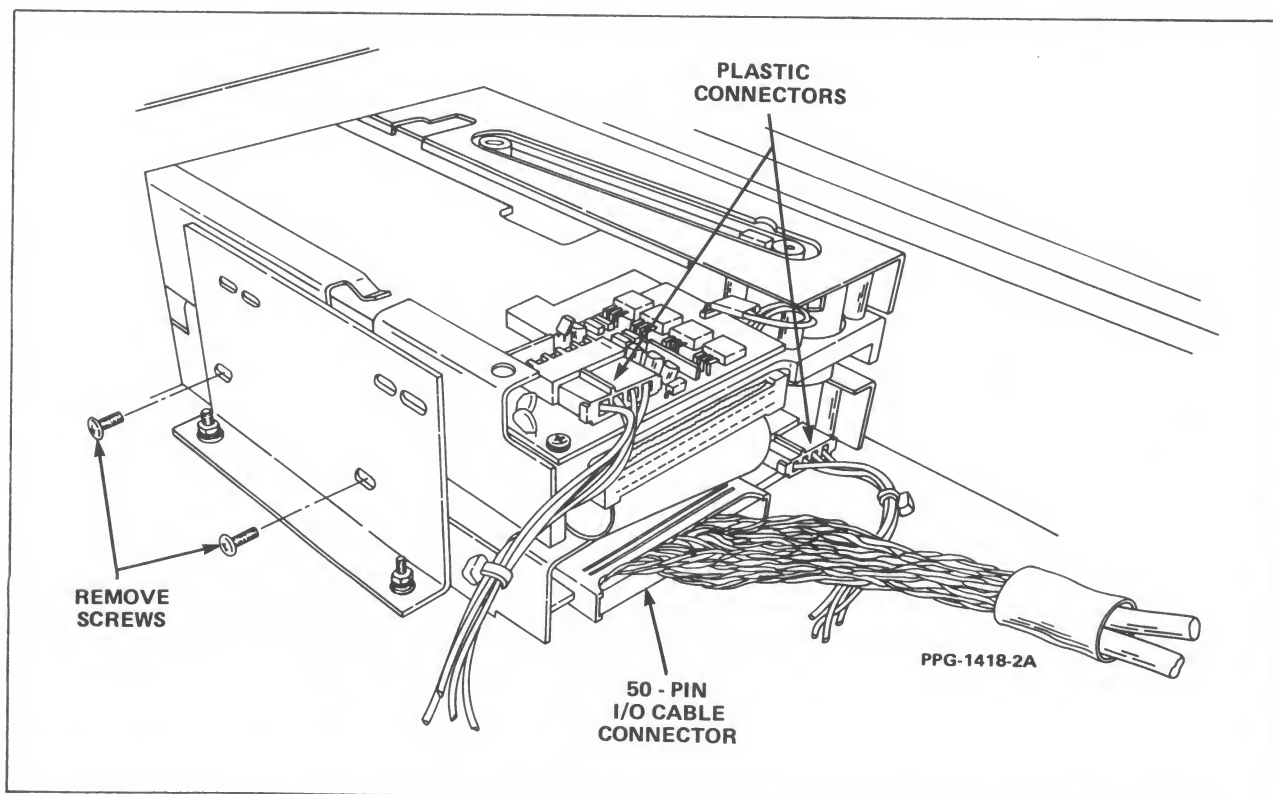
Tape Cartridge Drive Cable Connections and Support Frame
